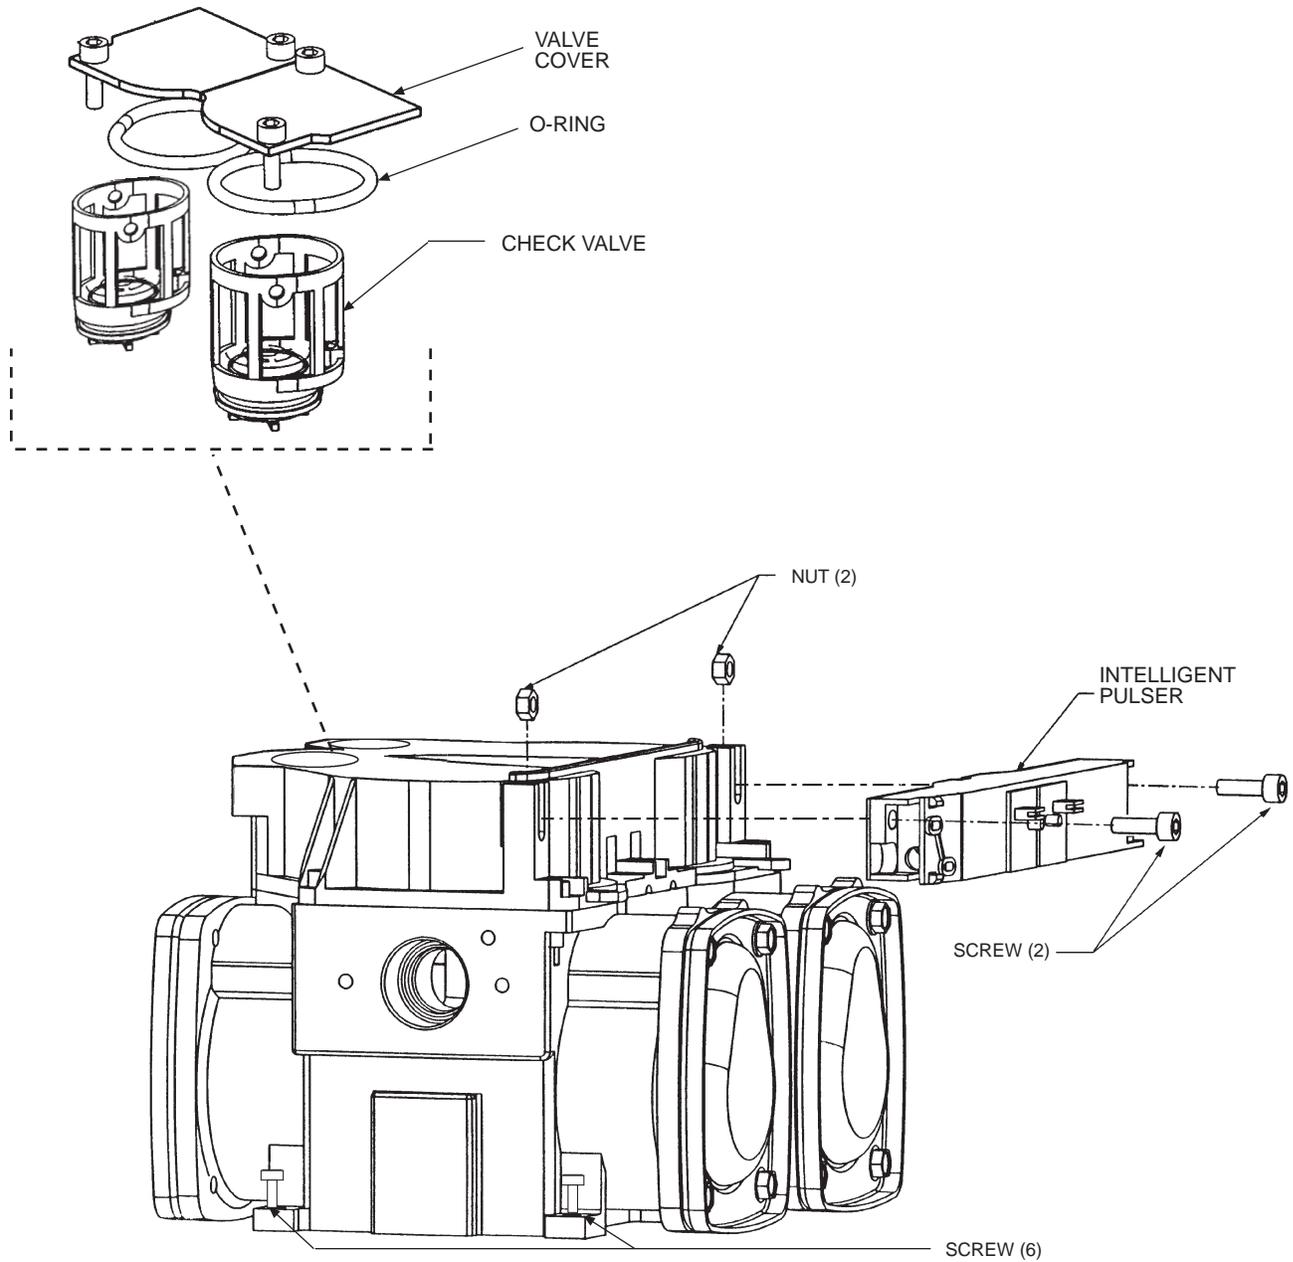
IMETER MODULE SERVICEABLE COMPONENTS. *The replaceable parts on the iMeter module are the pulser, check & pressure relief valves, o-rings and valve covers as identified above.
